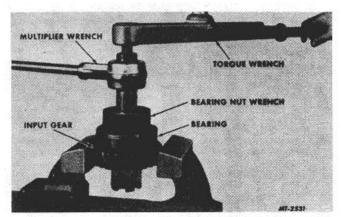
Removing or Tightening Input Gear Bearing Retainer Nut (RA-341)
